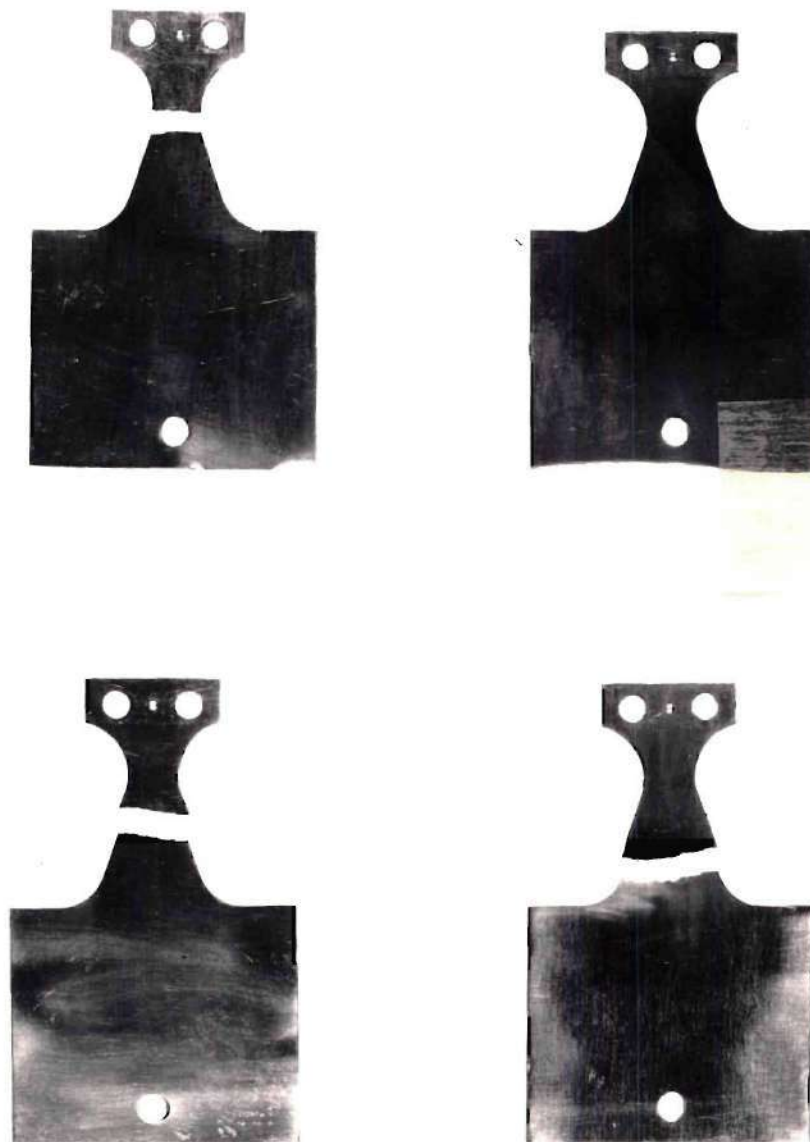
PHOTOGRAPH OF SPECIMENS
